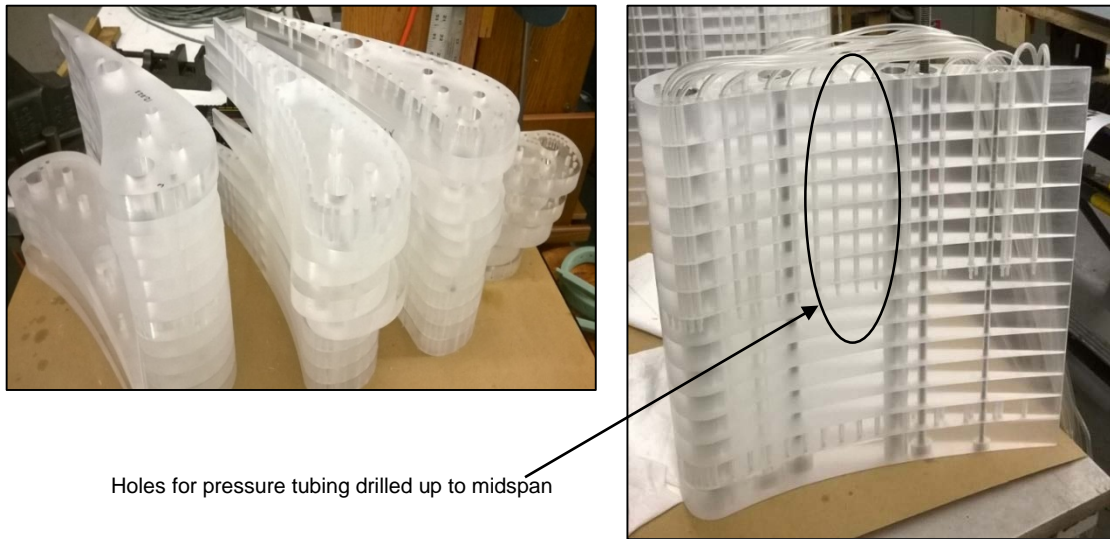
(Left) Slabs of acrylic machined into desired blade profile; (Right) All slabs stacked together using the compression force of steel threaded rods
